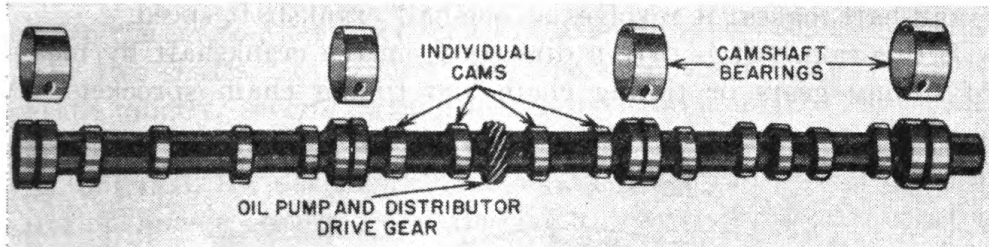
One-piece camshaft with camshaft bearings. Distributor and oil-pump drive gear in center of shaft are integral with it.
